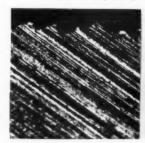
(Center) Typical 2½x%" End Mill. Fig. 5 (Above) Cutting edge of End Mill shown in Fig. 4, as commonly reground. Fig. 6 (Below) Cutting edge of End Mill (Fig. 4) when high surface finished. (Magnification 100X).
